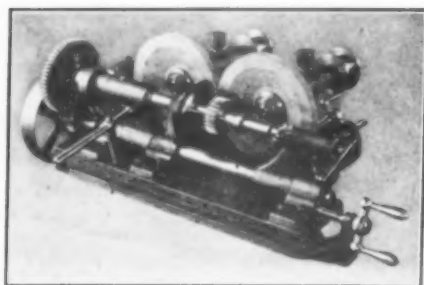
ELLIPTICAL KNIFE GRINDER.
